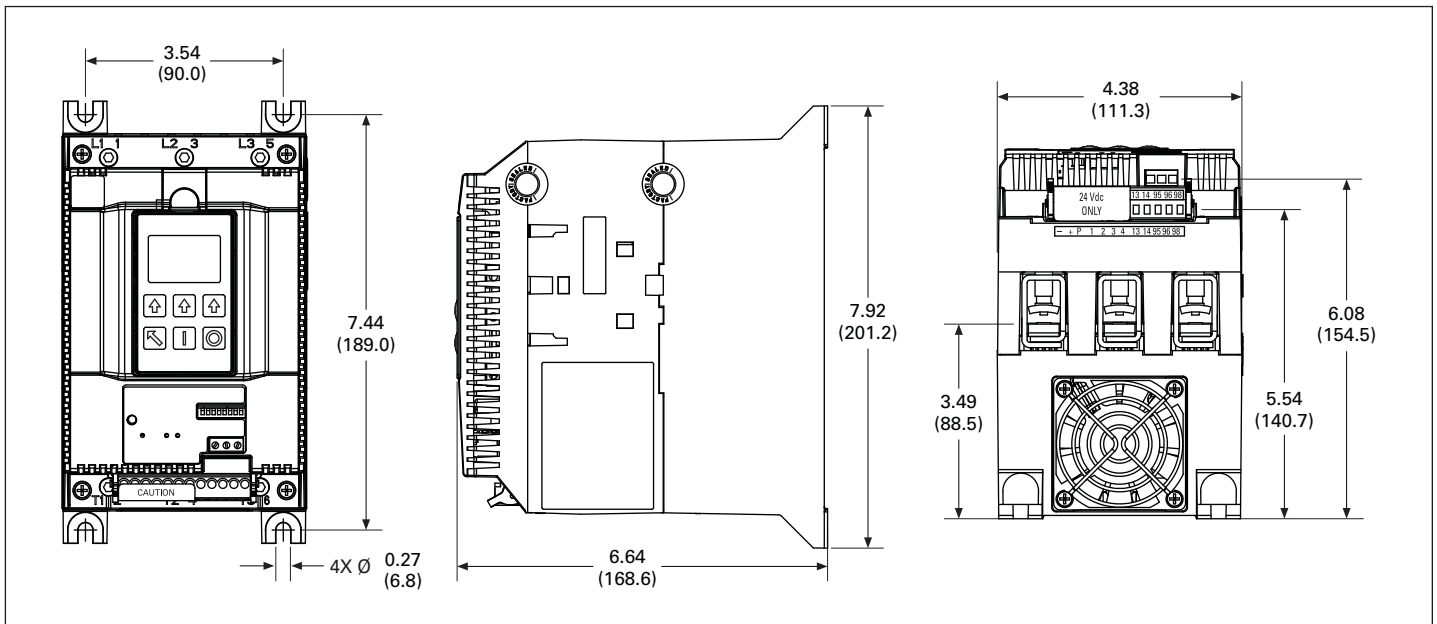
R-Frame (110 mm) S811+ Approximate Dimensions in Inches (mm)
